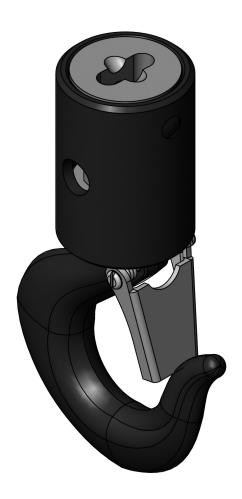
G. LOWER HOOK BLOCK ASSEMBLY 1/4 TO 1 TON
